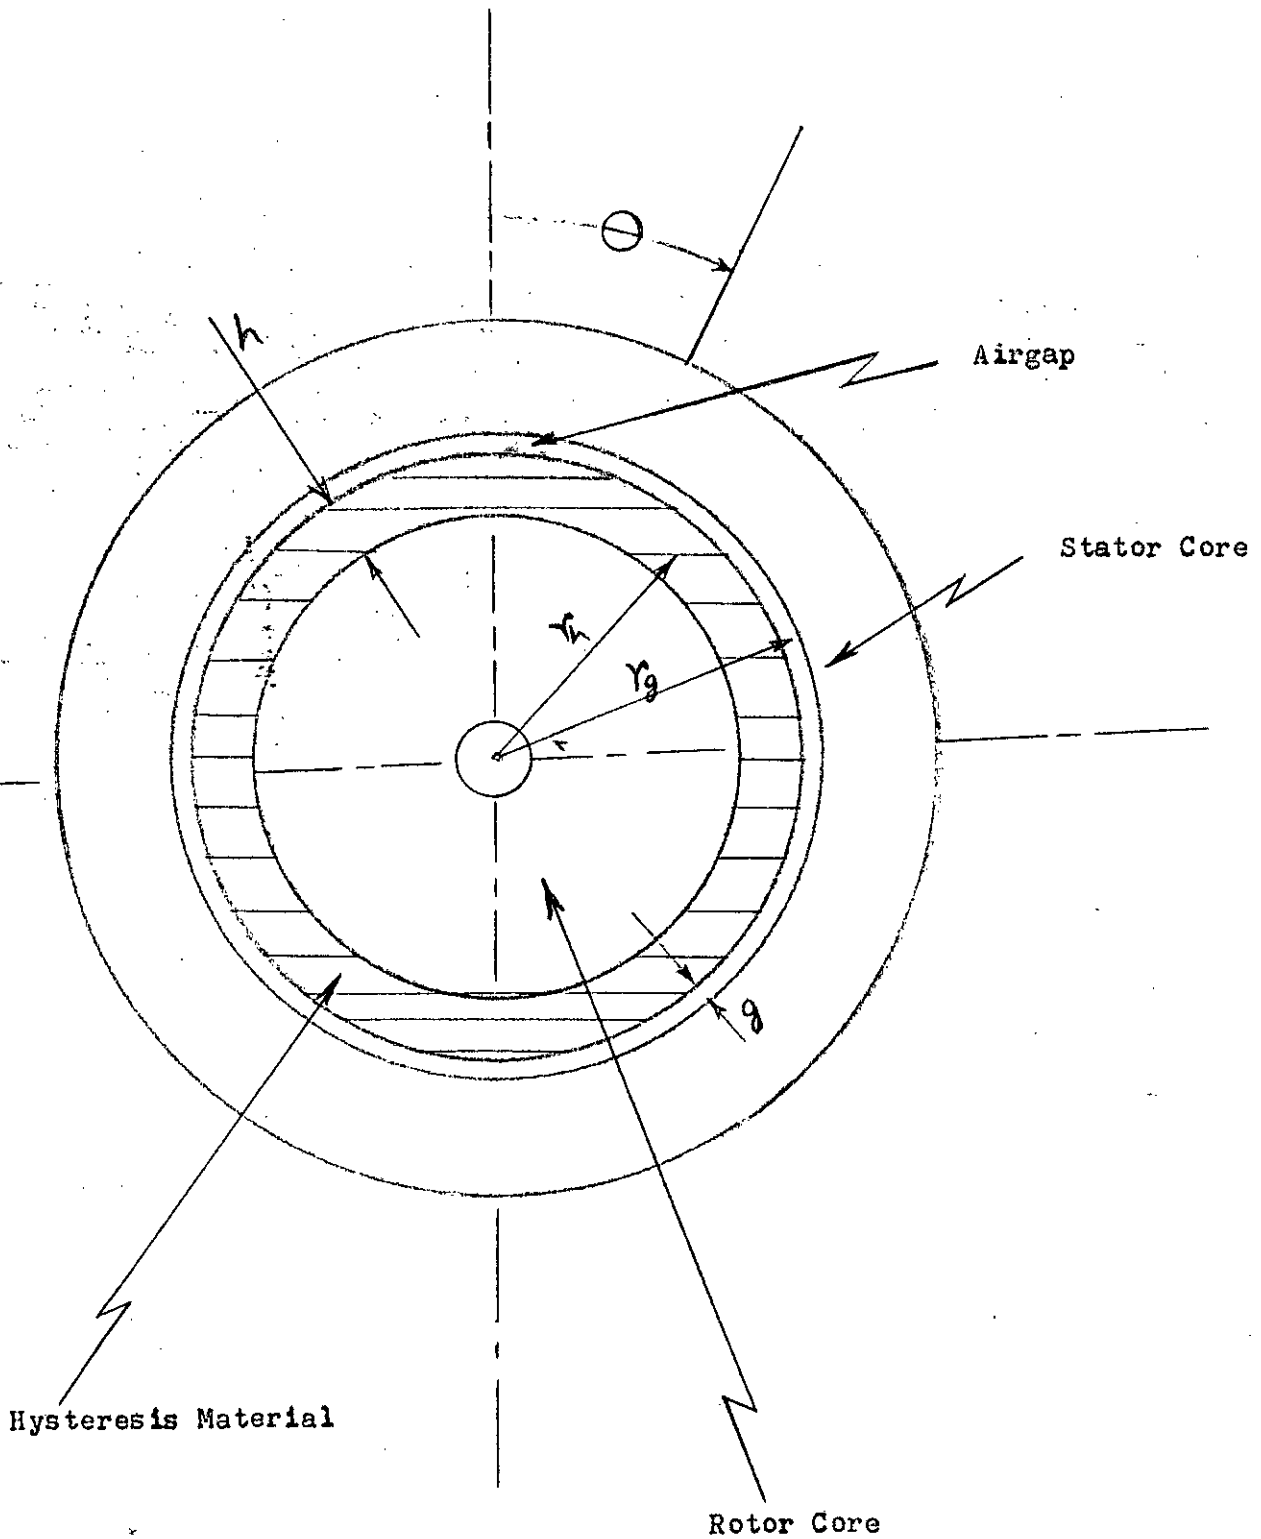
Cross -Section of Hysteresis Machine Showing Dimensions.
